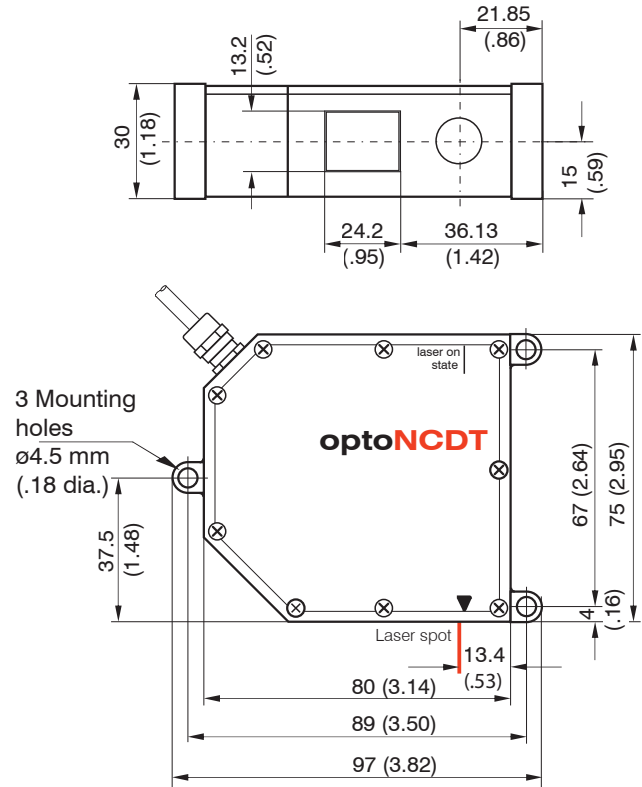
Sensor dimensions, measuring ranges: 2/10/20/50/100 mm, dimensions in mm (inches), not to scale
